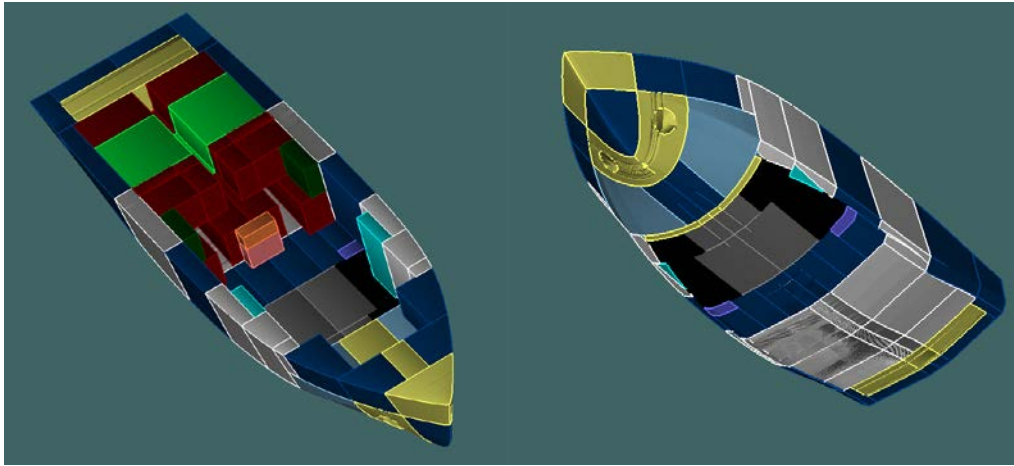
Tank Arrangement - Top View (Left), Bottom View (Right)
